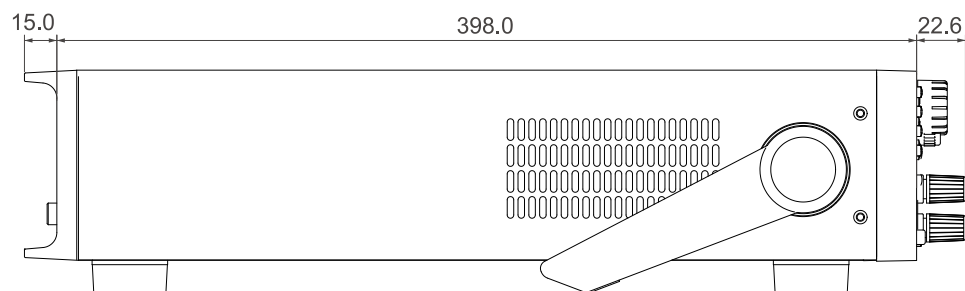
N3411 Series Master Chassis side Dimension(mm)
